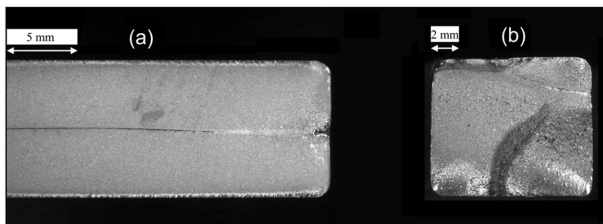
Fracture surfaces of a fretting specimen (a) and a plain fatigue specimen (b).
